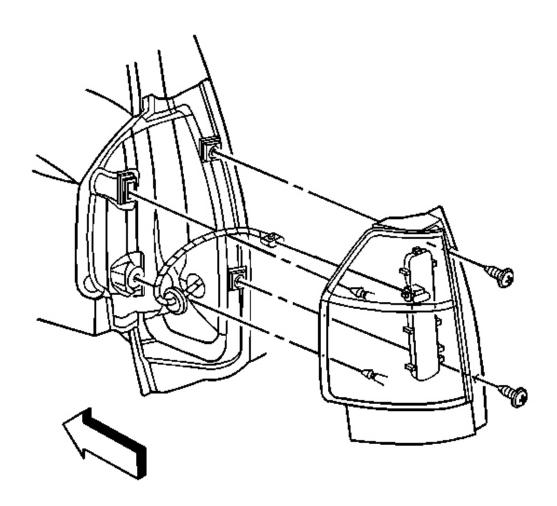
View Of Tail Lamp Components Courtesy of GENERAL MOTORS CORP.
